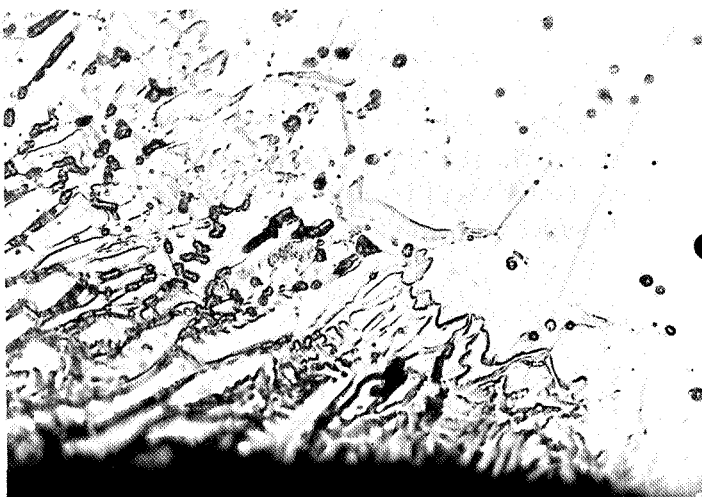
Surface of weld interface 316L base metal (left), and 316L weld metal (right) after 2 yr. exposure to urea synthesis environment. No evidence of attack on weld or base metal (mag. 1,000x).
